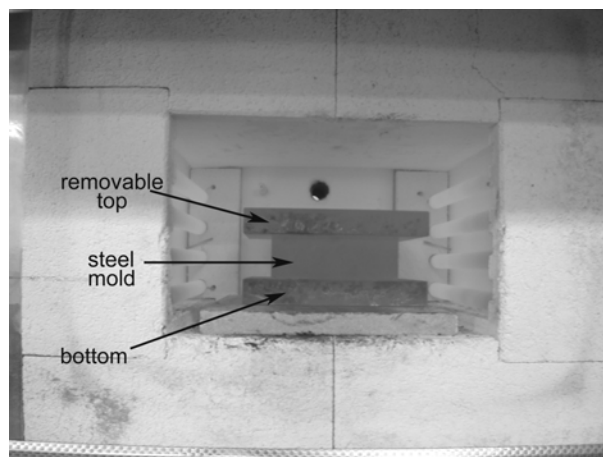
Foaming in the furnace with a steel mold closed at the top and bottom.
